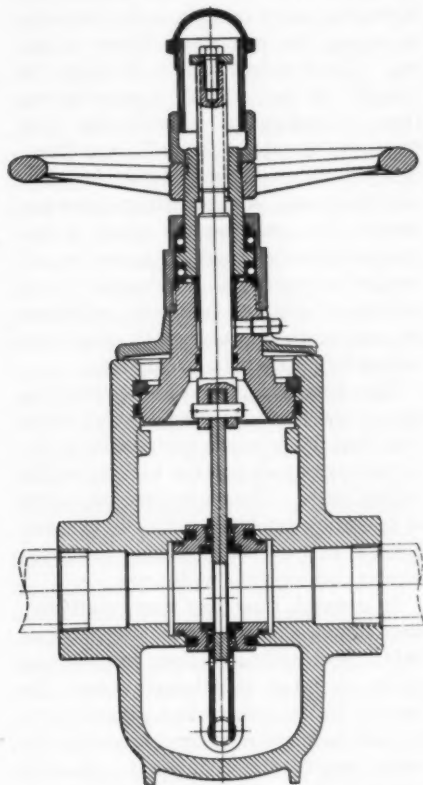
Ring Follower Type Gate Valve With O-Ring Seats
